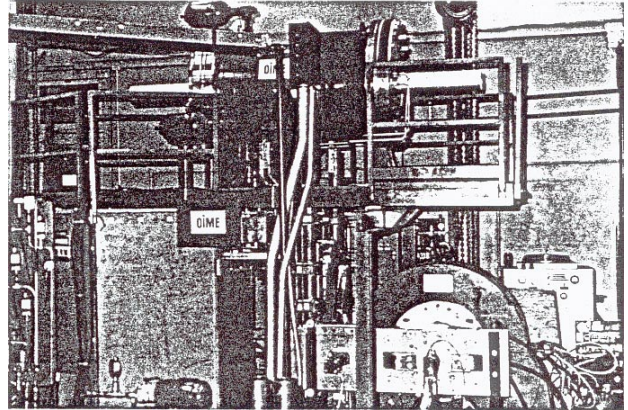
10 MJ homopolar generator and OIME, Inc., pipe welding fixture
